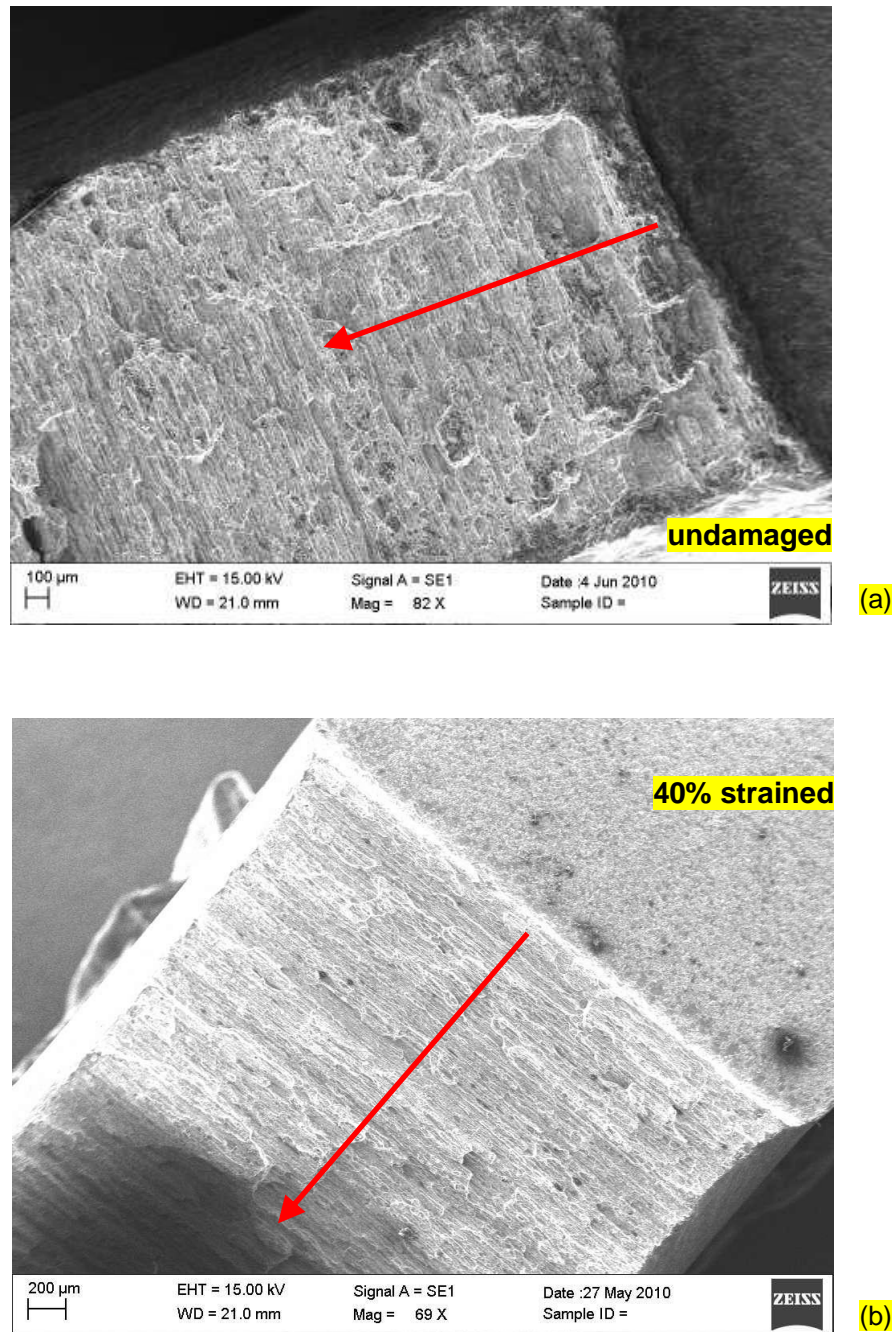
Fracture surface from “undamaged” (a) and 40% strained (b) disk specimen.
